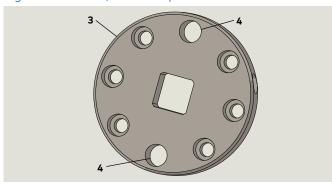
Shaft adaptor mounting to Motion Assist 360 drive
